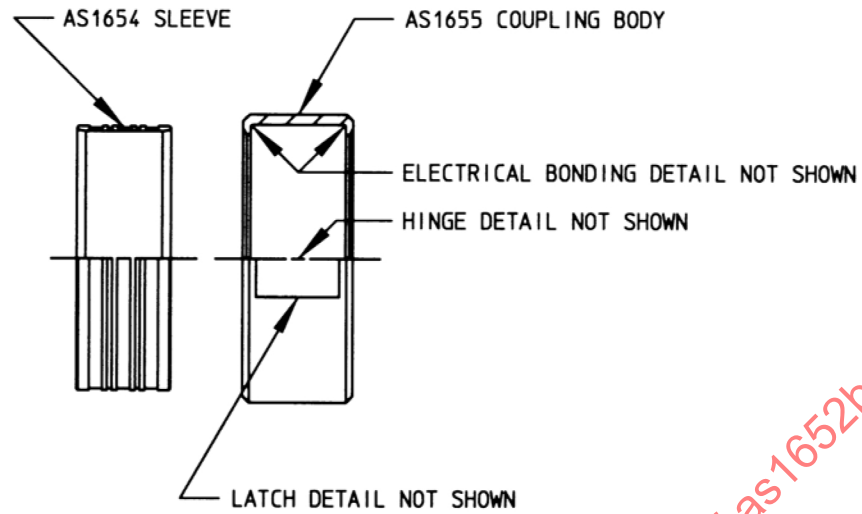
COUPLING ASSEMBLY, EXPLODED VIEW
